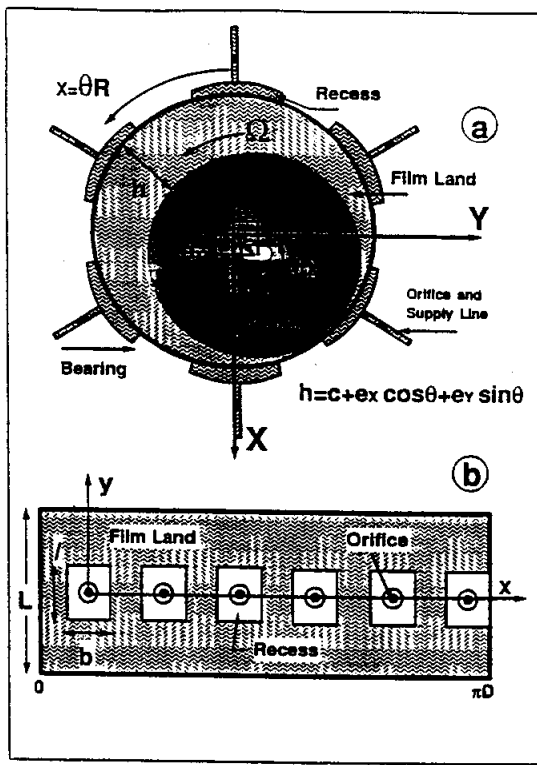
Geometry of a hydrostatic journal bearing; (a) axial view and coordinate systems, (b) unwrapped bearing surface
